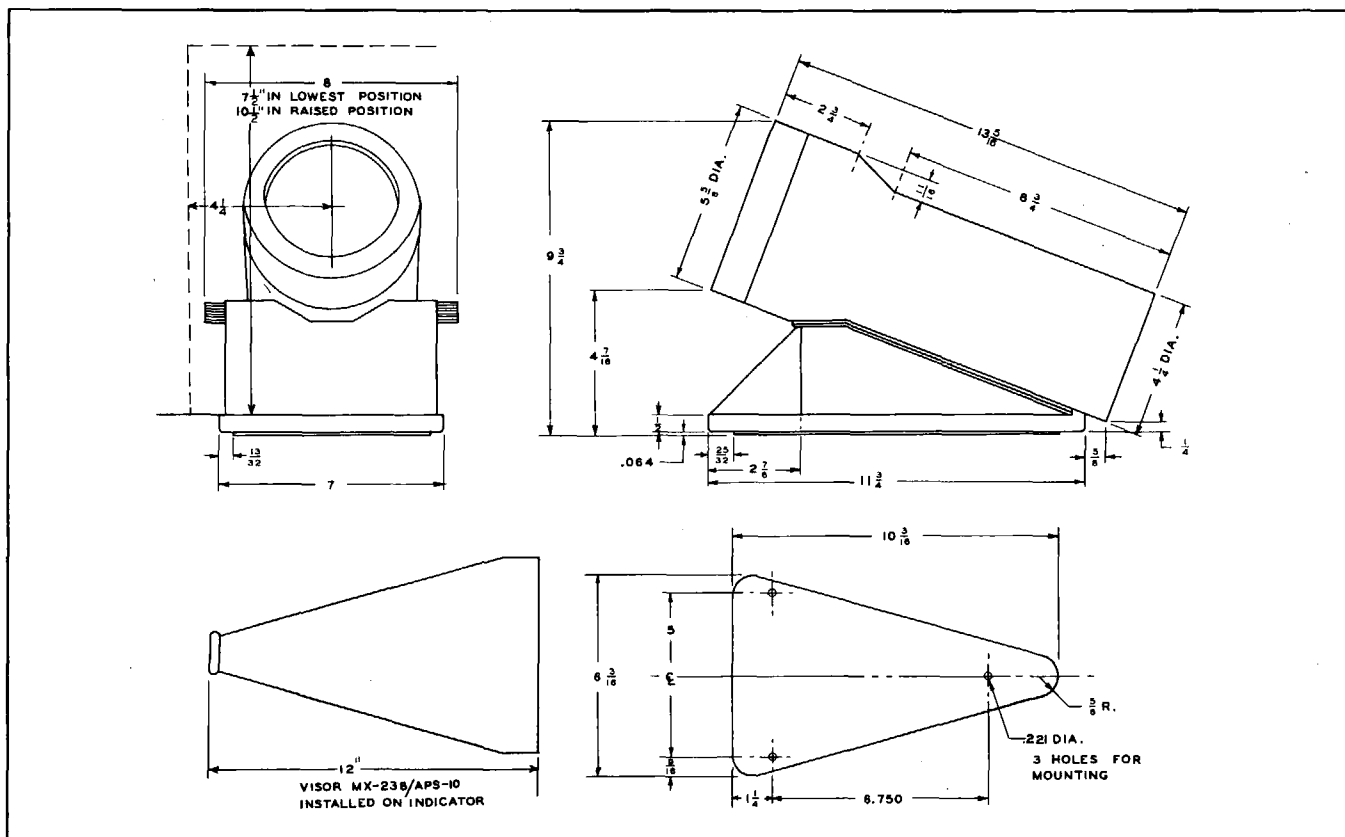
Indicator ID-99/APS-10—Outline Dimensions
